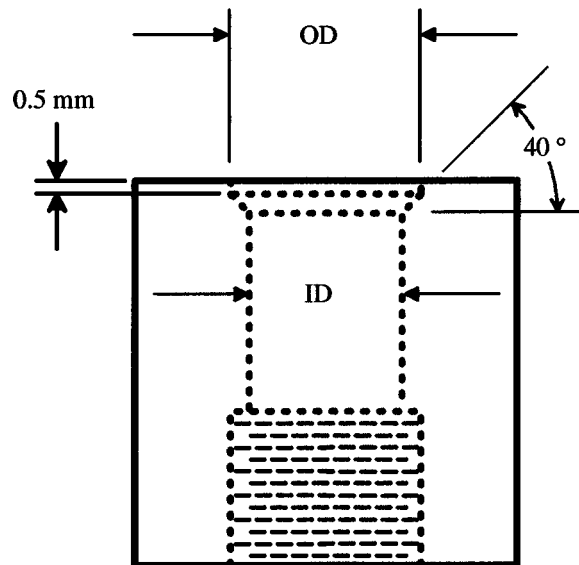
Suggested Design of the Head Bearing Fixture for Use With a Copper Ring
